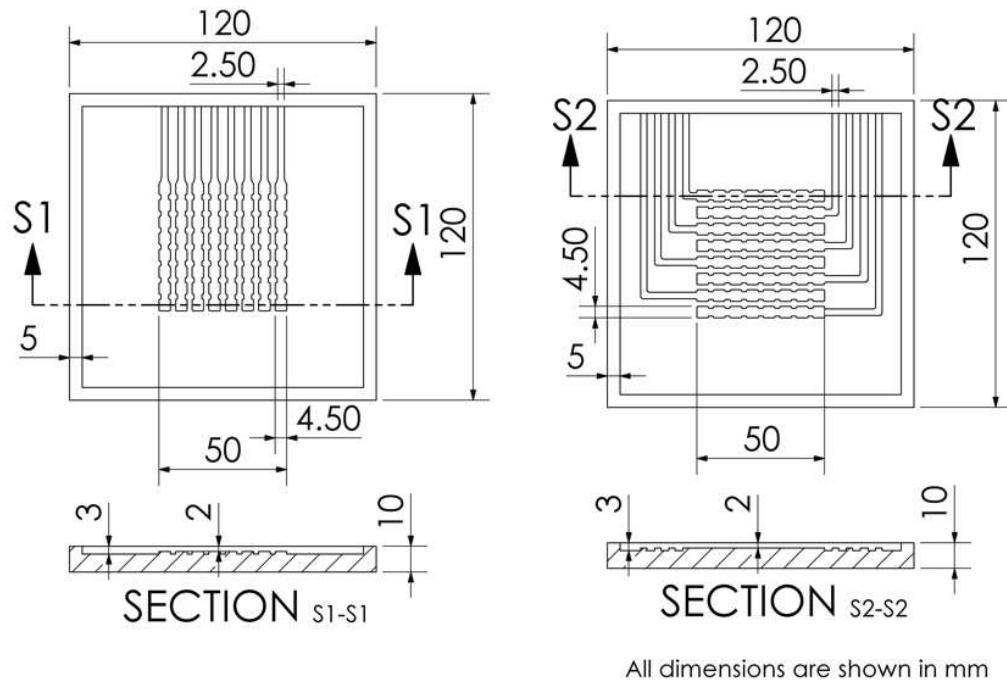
Schematic showing the design and dimensions of the 3D printed molds for molding top and bottom Ecoflex 00-30 silicone encapsulation masters. These masters are later used for casting hydrogel electrodes.
